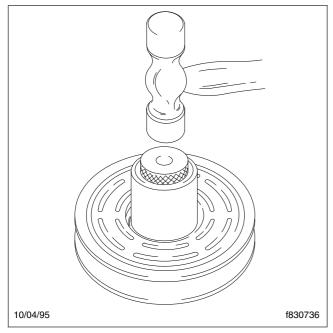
, Drive the Rotor Pulley Down Against the Front Housing Step
